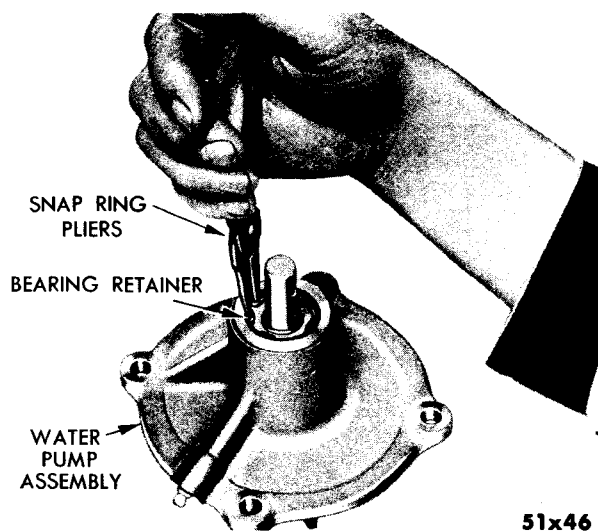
Removing or Installing Bearing Retainer (Tool C-760)
